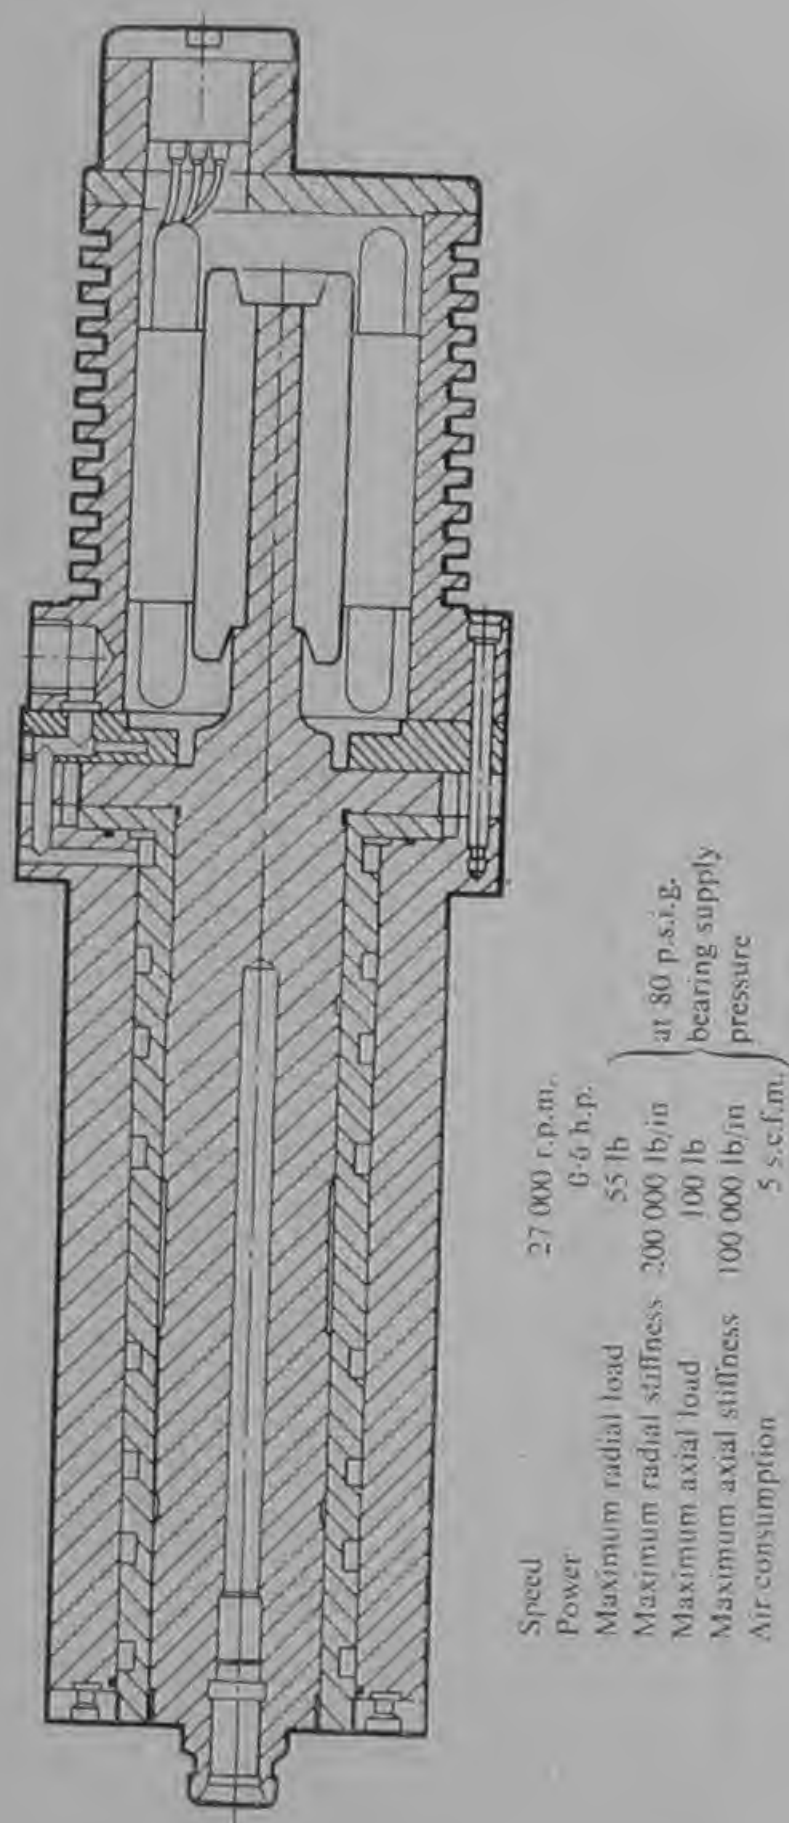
Air bearing high-frequency motor driven internal grinding spindle
